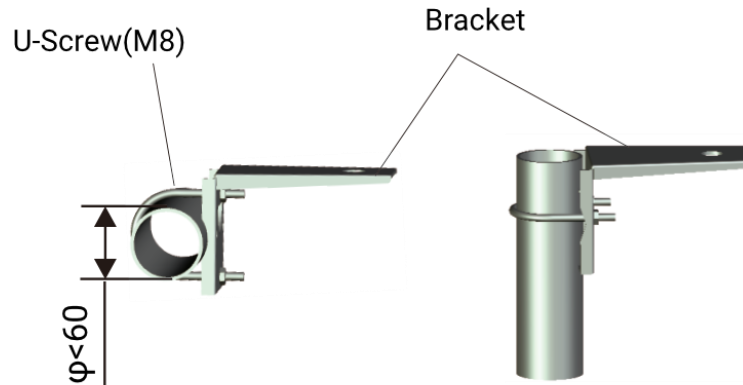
Installation on Bracket with Round Tube or Wall Mount
